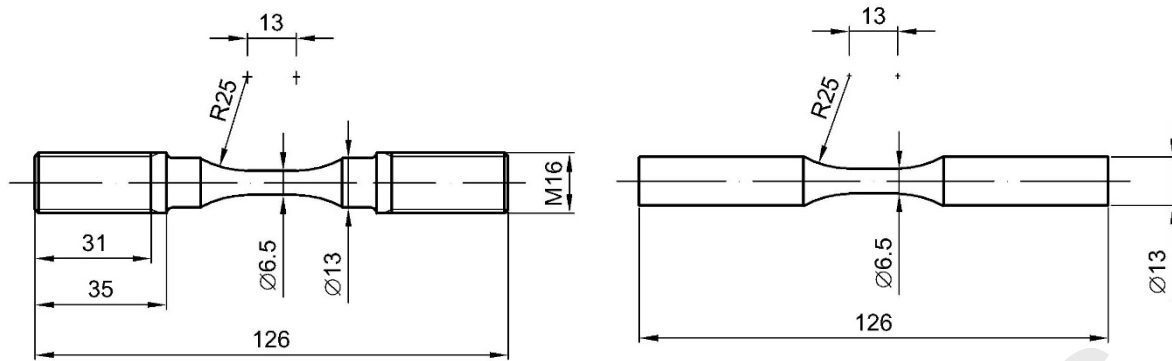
Dimensions of specimens used in: (a) creep tests; (b) fatigue tests (units: millimeters).
